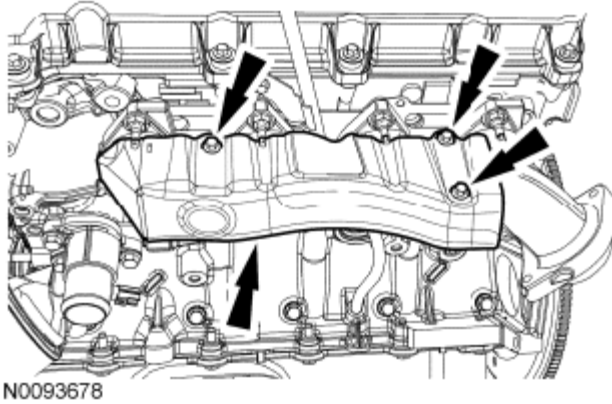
Locating LH Exhaust Manifold Heat Shield
